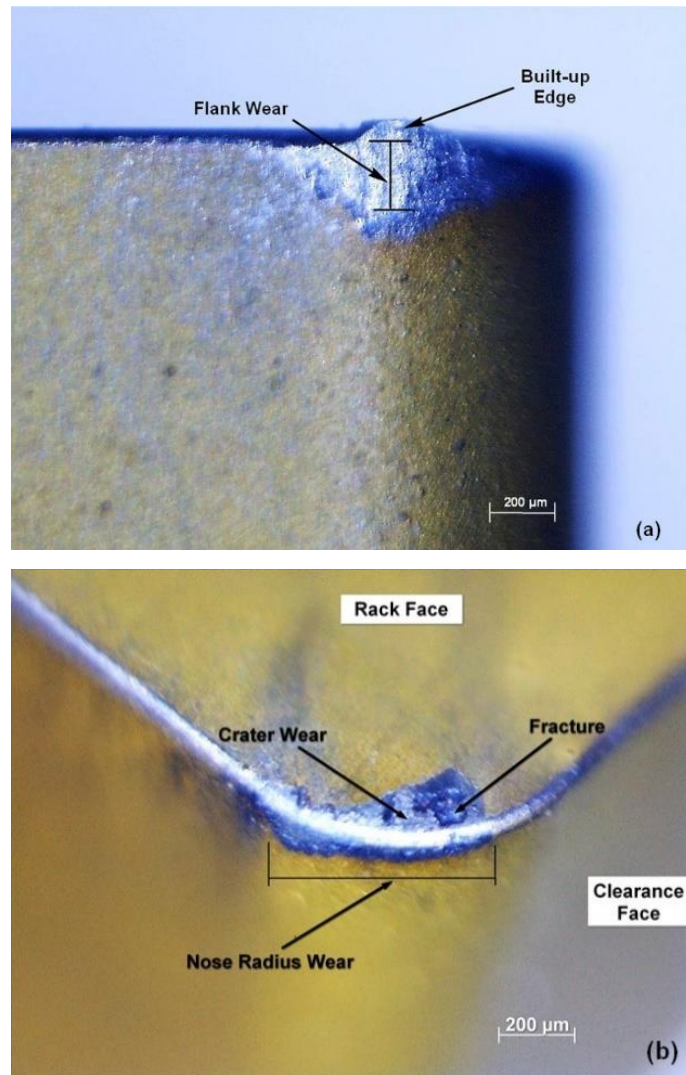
(a), (b) Deformations occurred on the surface of the cutting insert after machining.
